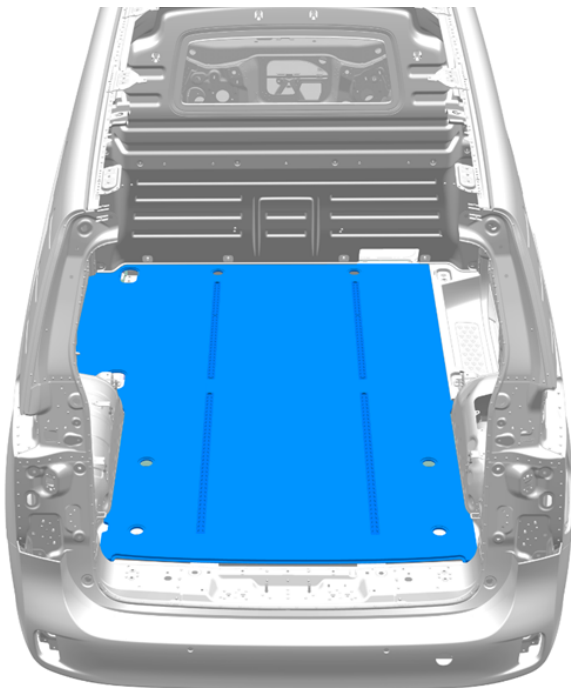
Universal wooden floor with lashing rails, shown here: Cargo version with the sliding door on the right.
